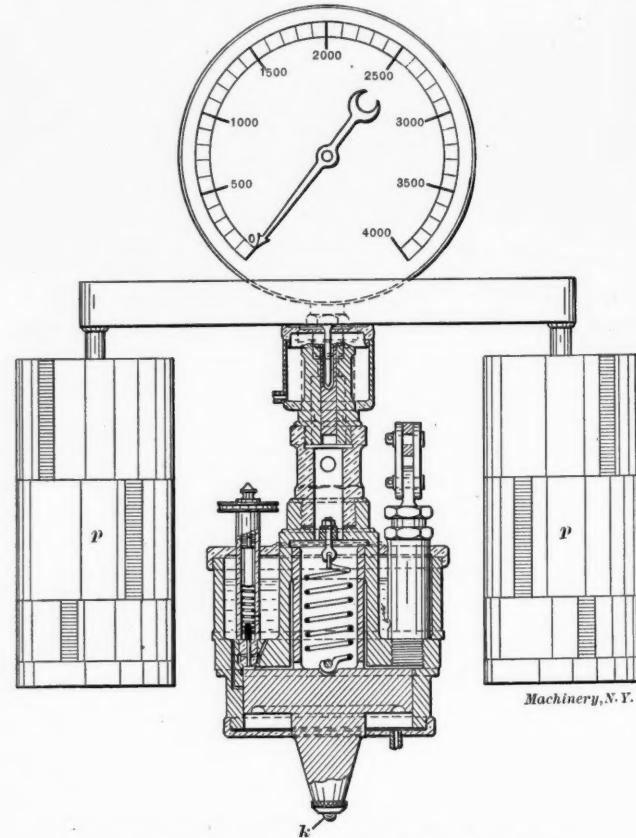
Section of Press Cylinder of Machine in Fig. 2.
